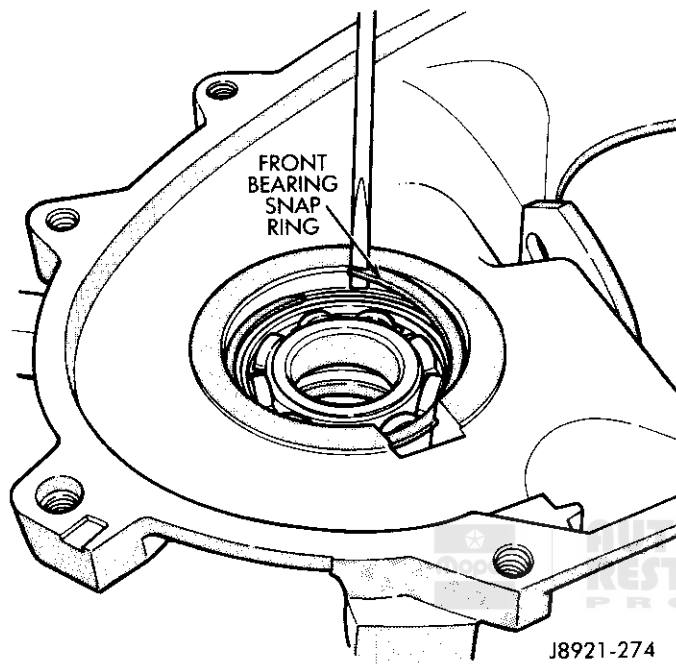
Removing/Installing Front Output Shaft Front Bearing Snap Ring
